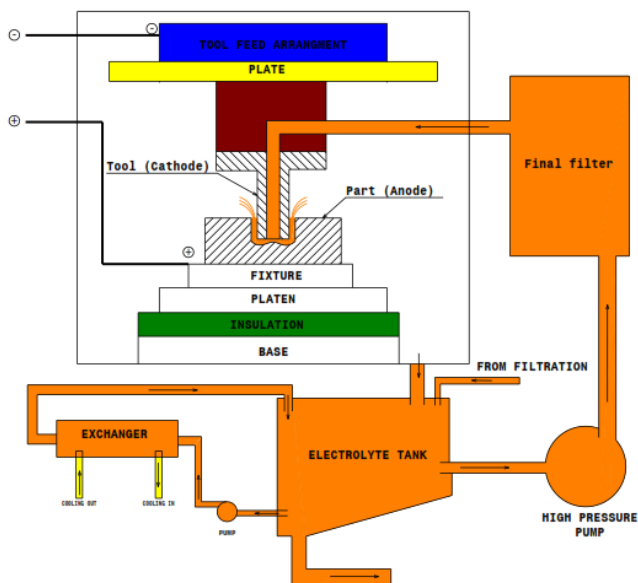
Electrochemical Machining (Shaped tube electrolytic machining -STEM).
